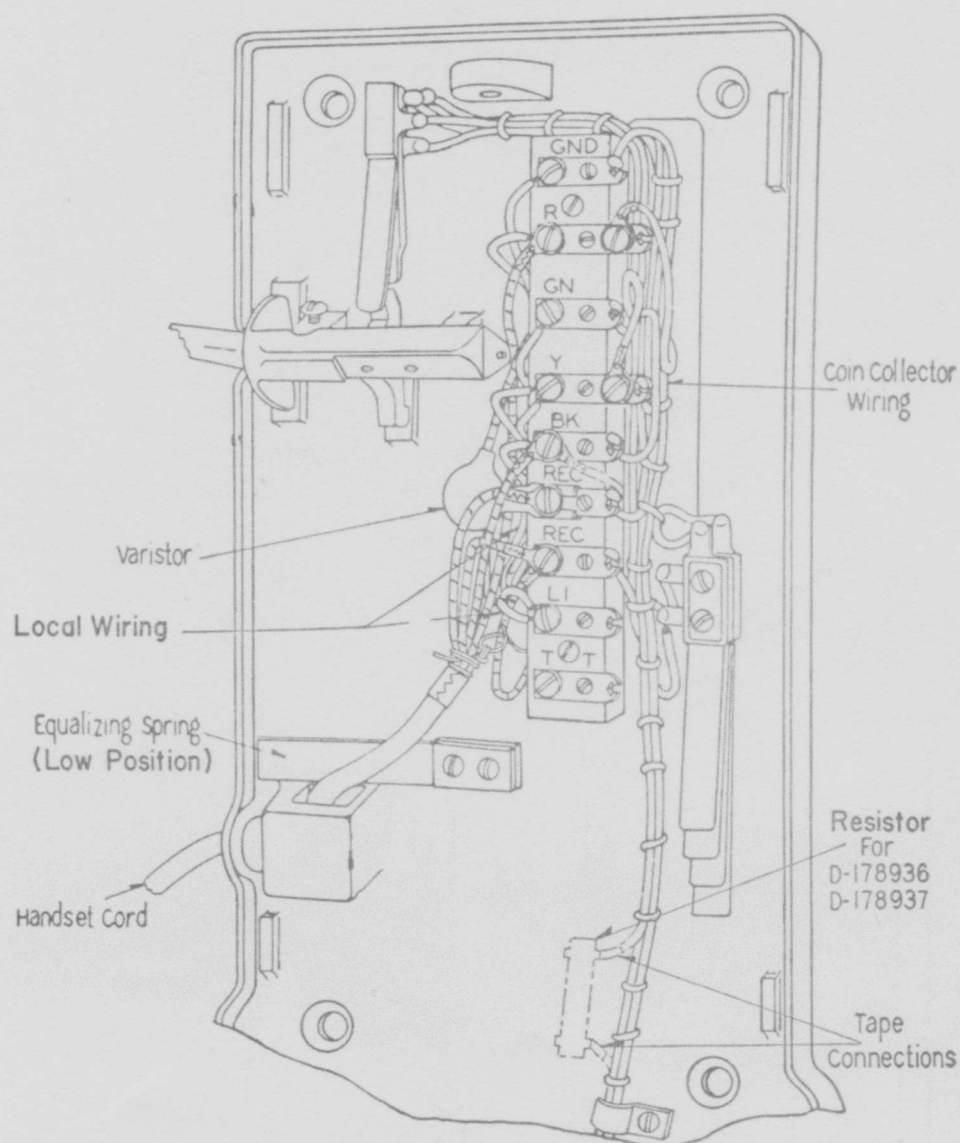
51, 151, or 153-type, D-178936 or D-178937 Coin Collector—Backplate Assembly
